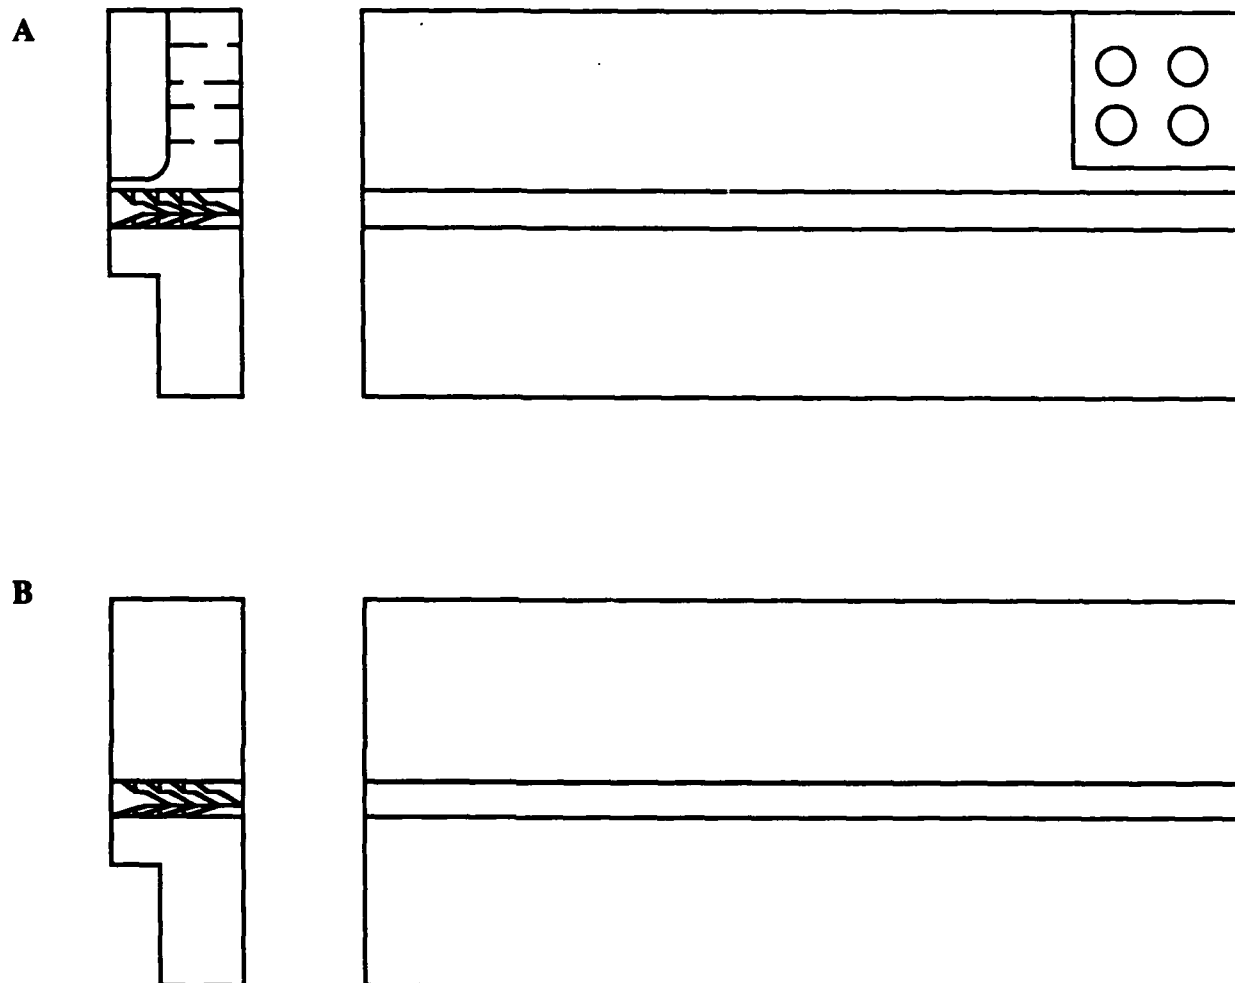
Original Weldment Sections Which Yielded Three CT-Specimens (A), and Four CT-Specimens (B).
